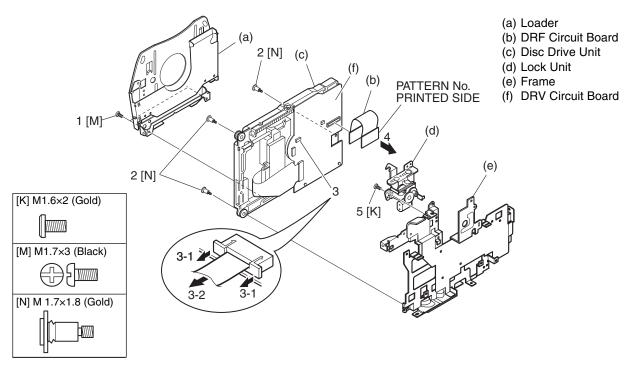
Loader, DRF Circuit Board, Disc Drive Unit, and Lock Unit
